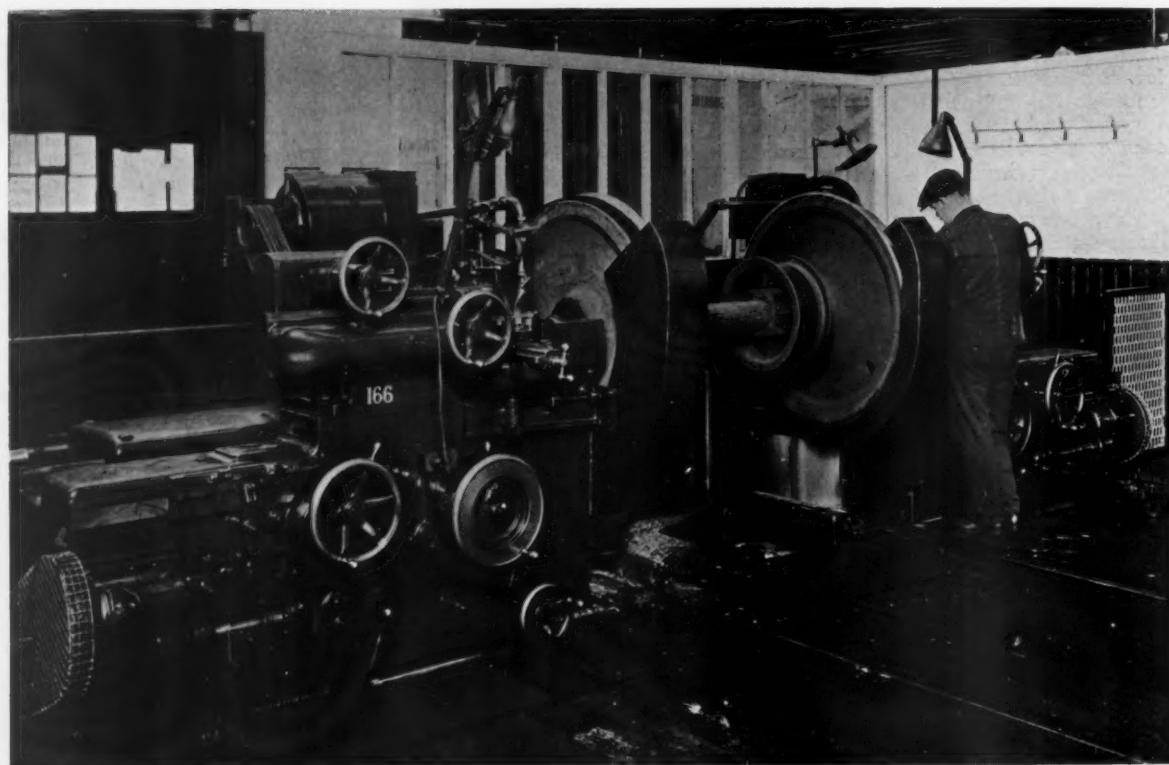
Grinding the journals of a standard L.M.S.R. carriage axle on a Churchill D.A.J. grinding machine installed at St. Rollox works
